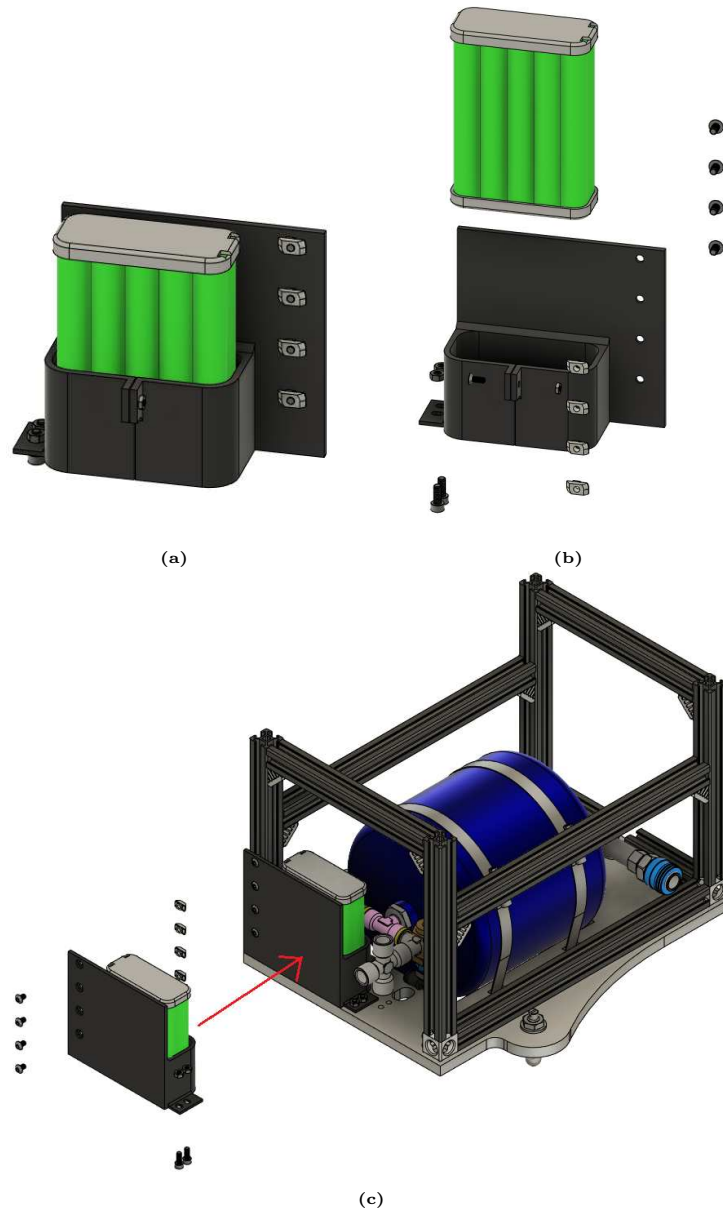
(a) Battery assembly, (b) exploded view and (c) mounting on the main structural frame.
